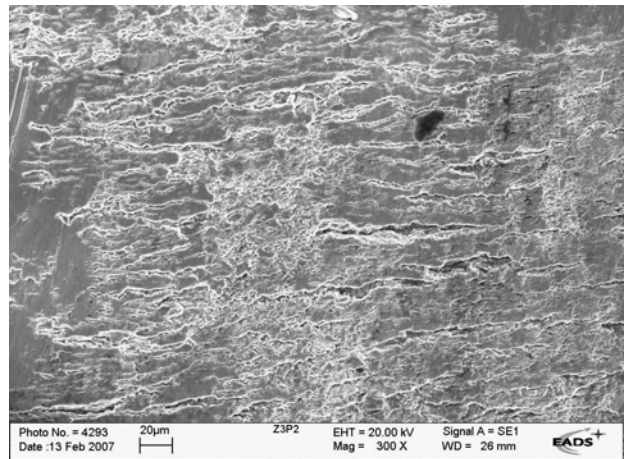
Surface cracks in the area with fretting corrosion
